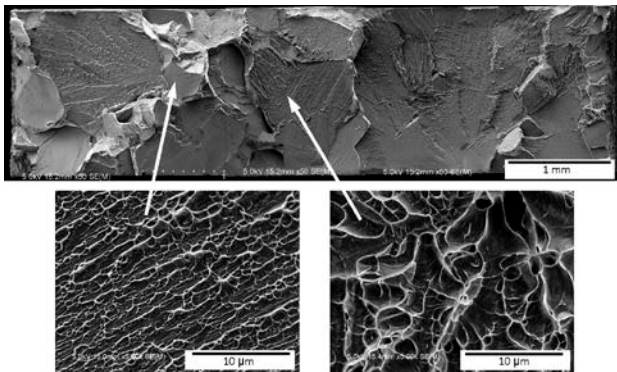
SEM images showing an example of fracture surface of tensile tested sample of GTAW Ti5553-Ti5553 weld joint
